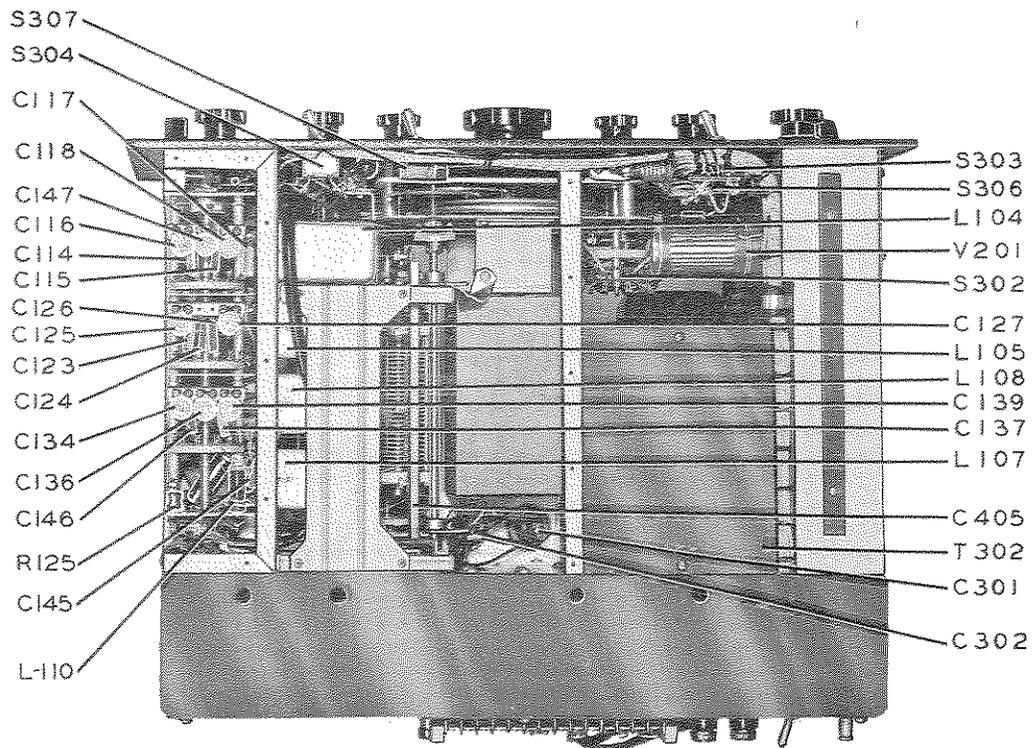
32V-3 Parts Arrangement - Bottom View
